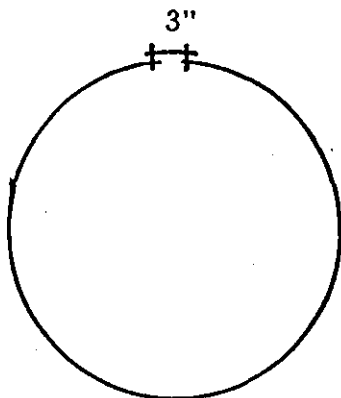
Sketch showing dimensions of base ring and root clamping.
